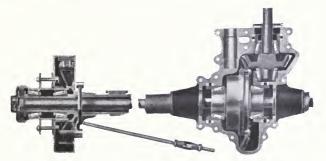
Clutch-Drive or Floating Type Rear Axle, Rear Vertical View at Left, Horizontal View at Right. Timken Roller Bearing Axle Company, Canton, Ohio.
